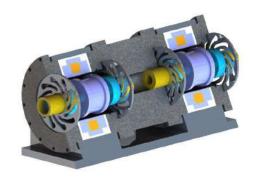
w: CAD integration of MICATM inside back to back balanced compressors
